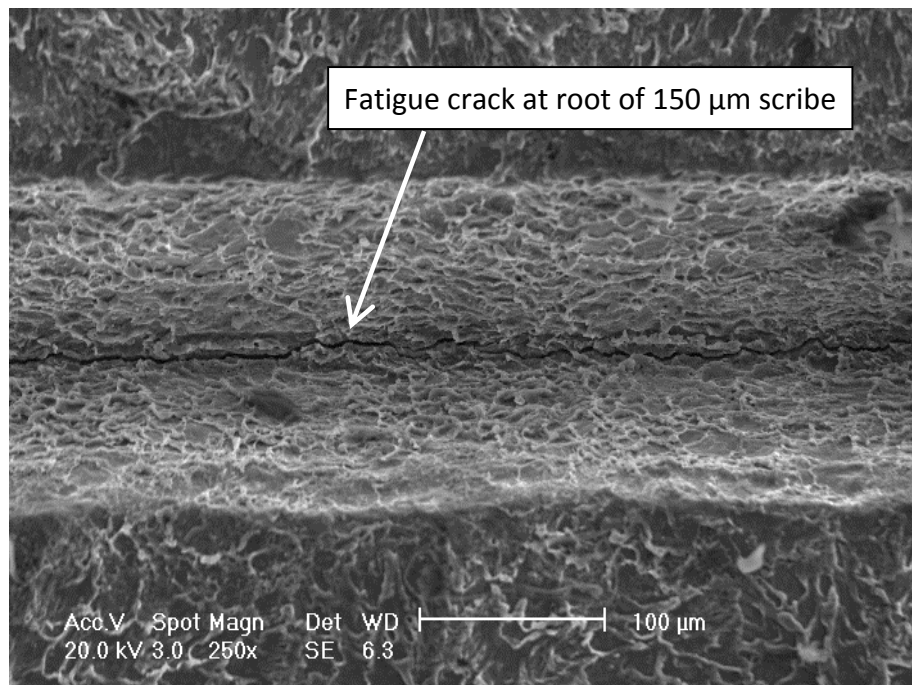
Fatigue crack visible at root of 150 μm deep scribe in sample peened using TOSH LSP treatment after fracture remote from scribe
